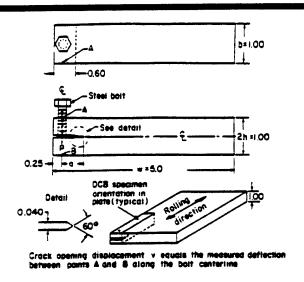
Bolt-Loaded Double Cantilever Beam (BDCB) Specimen.
